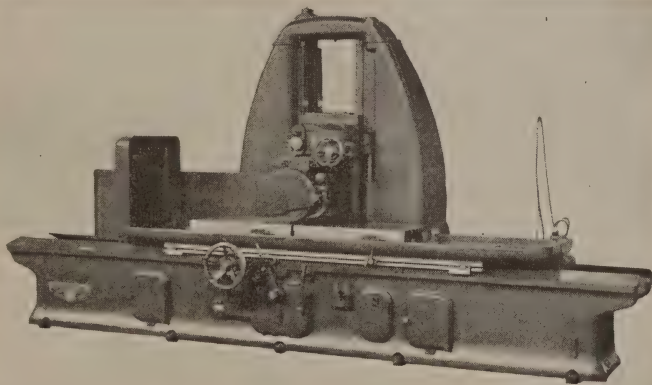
High-duty precision surface-grinding machine. For this machine Oilgear hydraulic units (pump shown in Fig. 314) provide smooth positive travel of the table at speeds from 30 to 100 ft. per min.; quick, cushioned table reversal; inching of table; automatic feed and rapid cross traverse of grinding wheel. (*Courtesy of Mattison Machine Works.*)
